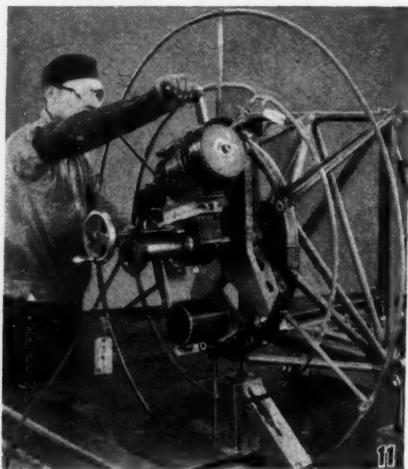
Grinding bosses on motor ring to insure solid mounting for motor.
